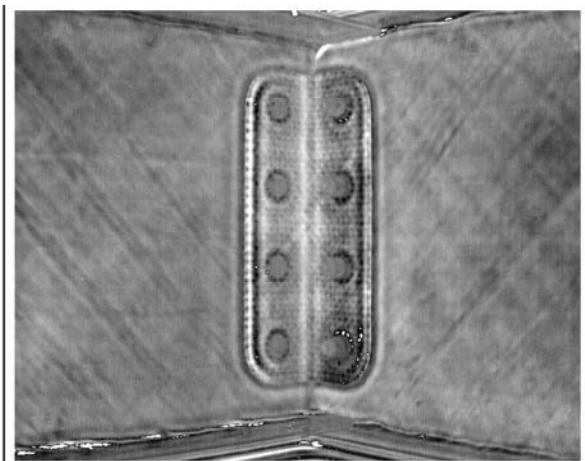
Thermal inspection results for cruciform 1, rivet 4.
